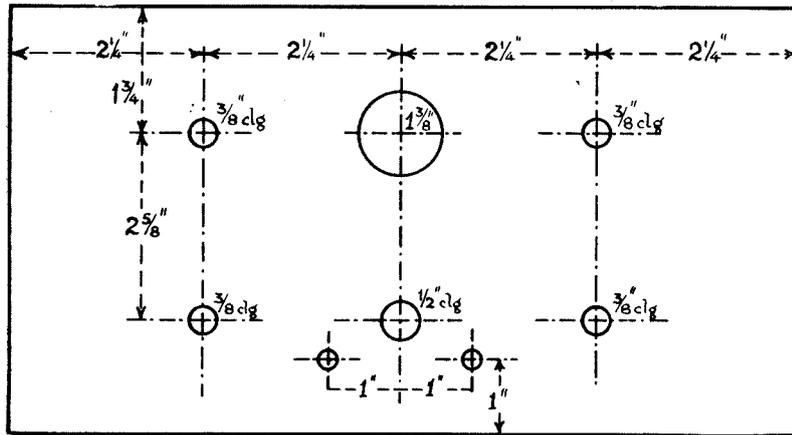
The box is drilled with several holes, the exact dimensions being as above.
